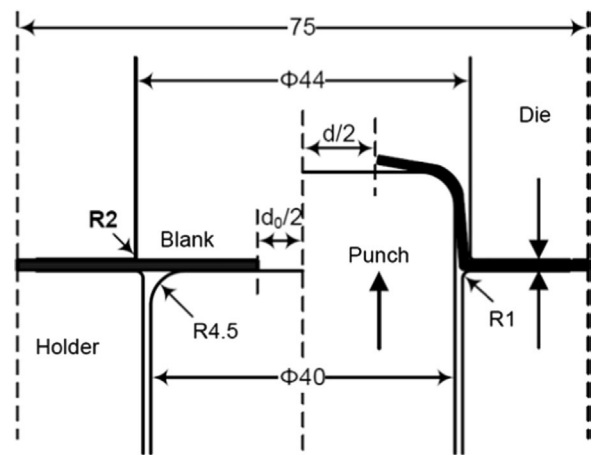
Schematic of hole expansion test setup using a flat-bottomed punch. All dimensions in mm [12].
